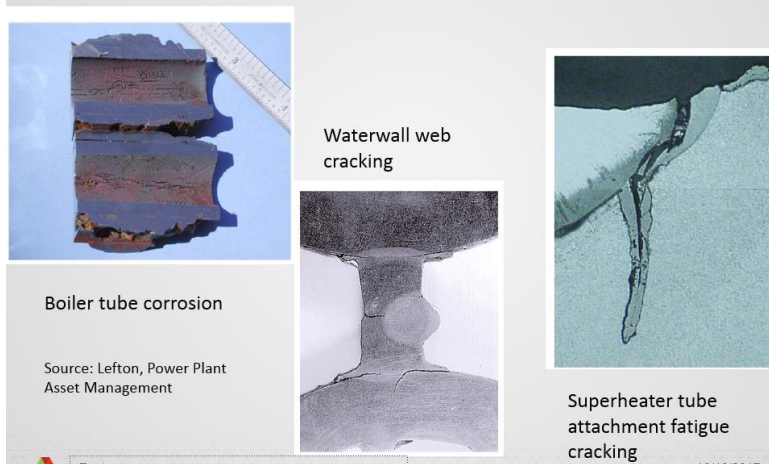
Examples of Fatigue Cracking, Waterwall Cracking, and Boiler Tube Corrosion
